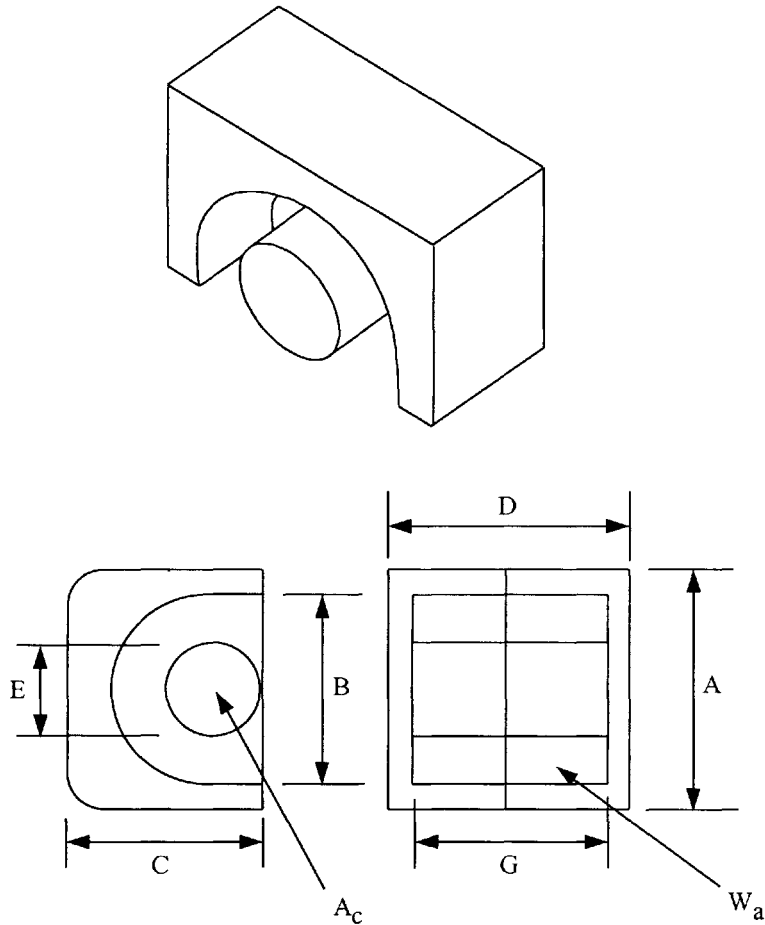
Dimension Outline for PC Ferrite Cores.
